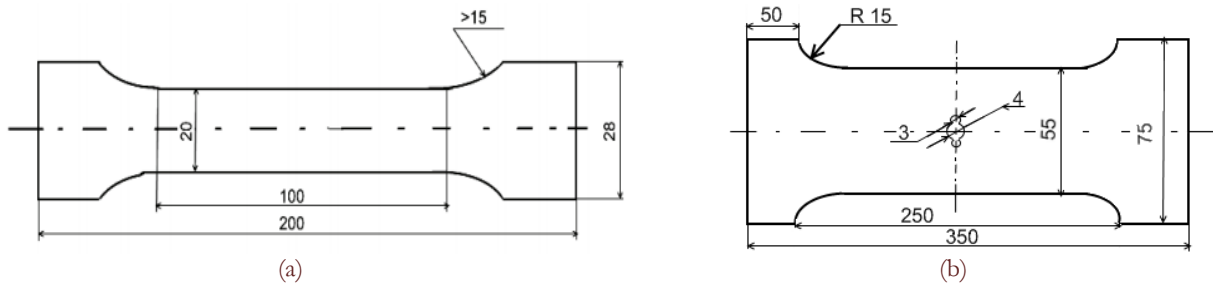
Geometry of specimen (a – smooth specimen, b – specimen with a hole). All sizes are in millimeters.
